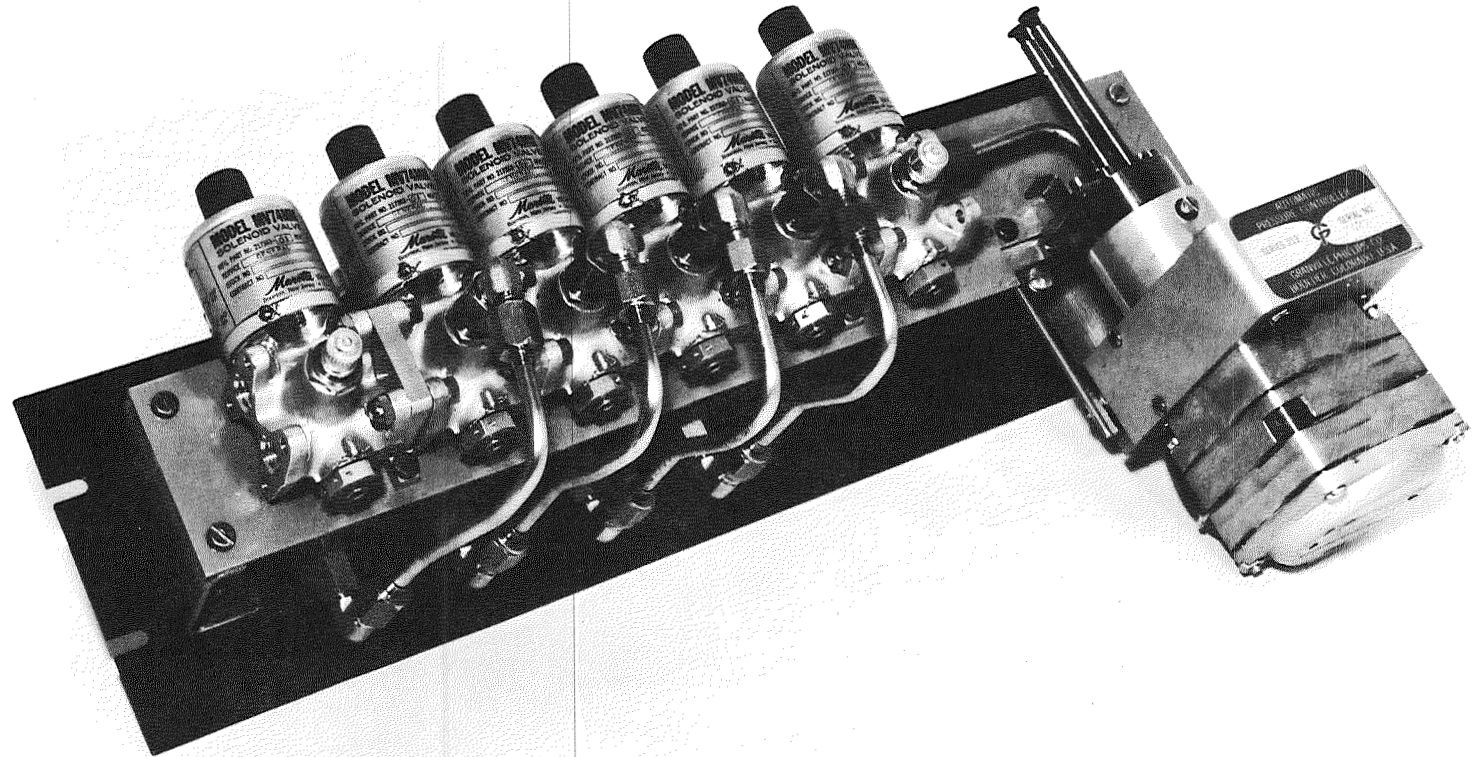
SAMPLE VALVE MANIFOLD AND SERVO VALVE DURING ASSEMBLY
